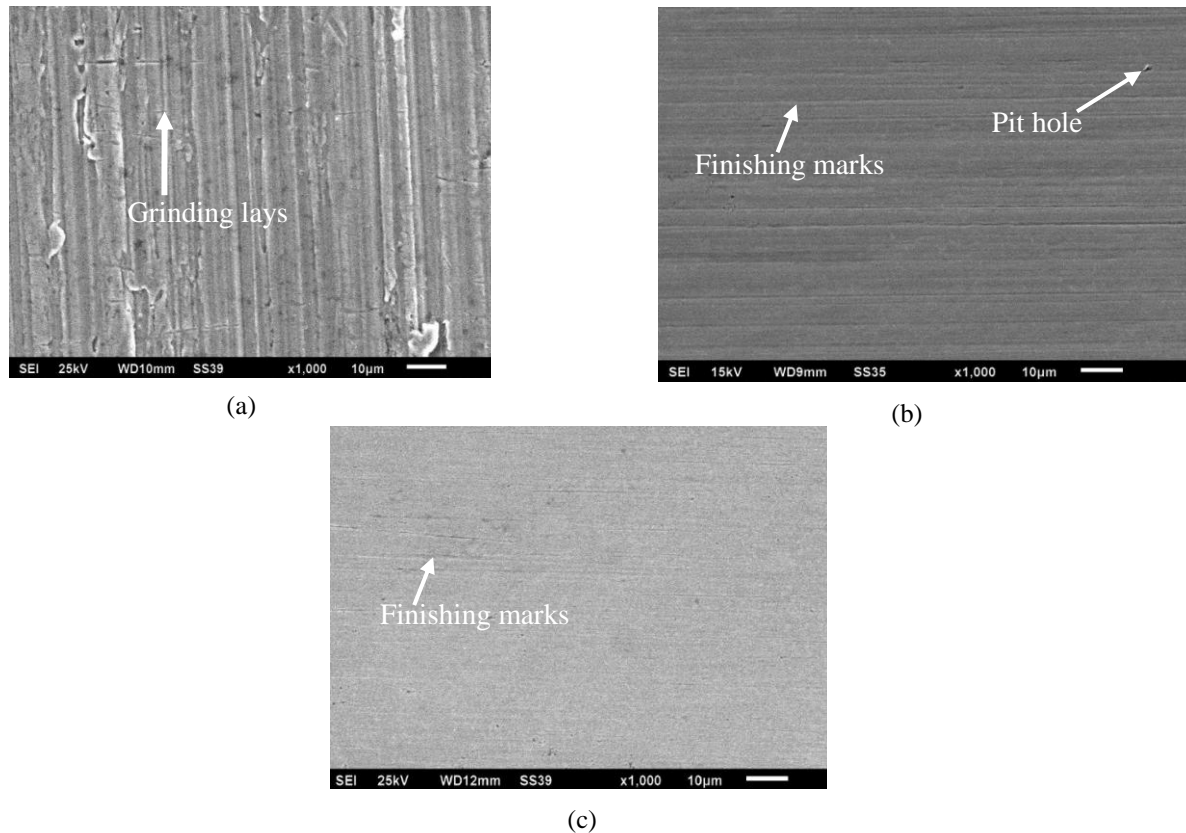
Scanning electron microscopy (SEM) images at 1000x of the inner surface of cylindrical mild steel workpiece (a) initial ground surface, (b) finished surface after 60 minutes of finishing with MR honing tool having flat end permanent magnetic strips, and (c) finished surface after 60 minutes of finishing with MR honing tool having curved end permanent magnet strips.
